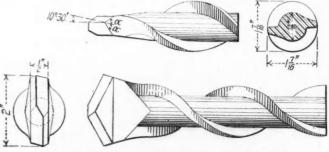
SPECIAL DRILL WITH SINGLE BIT
